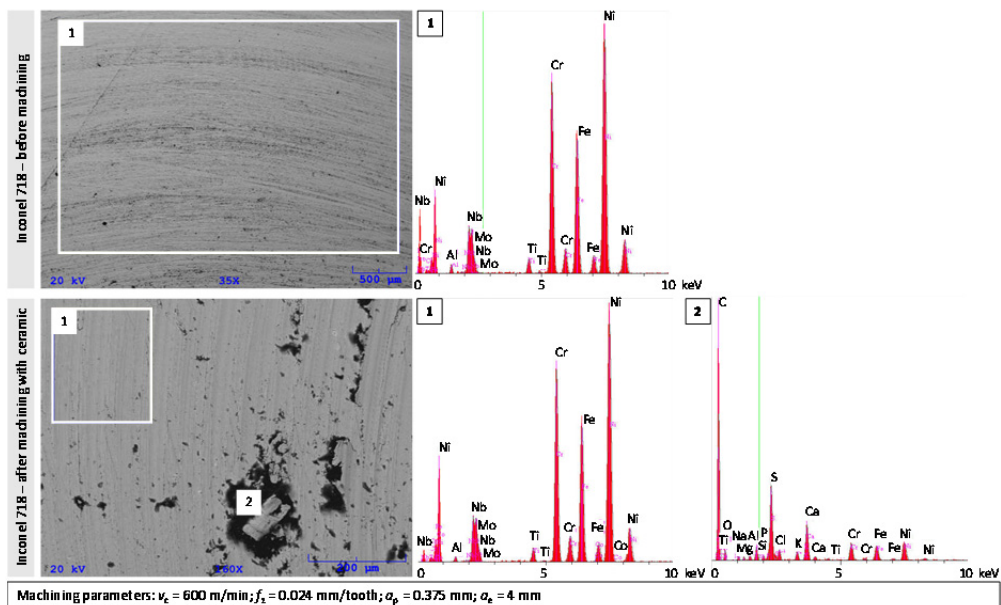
SEM-EDX analysis of Inconel 718; before and after machining with ceramic tool
